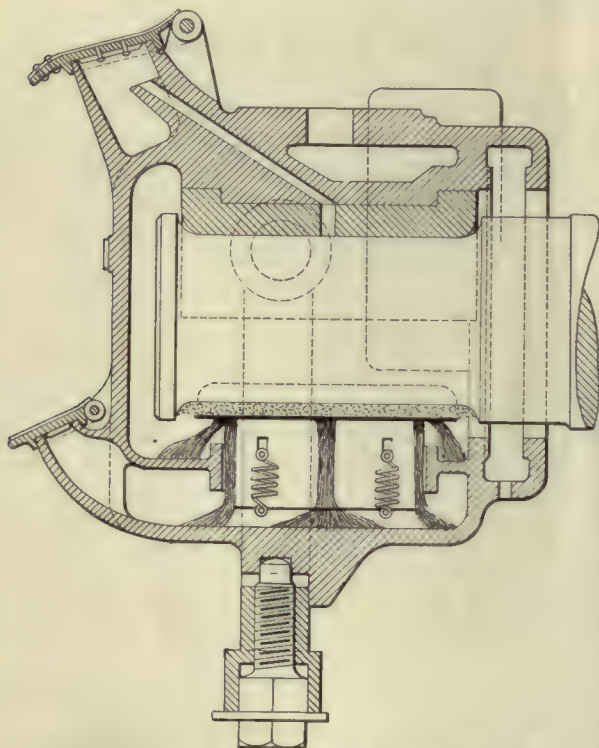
Old-Type Journal Bearing Construction Used on German Freight Cars
